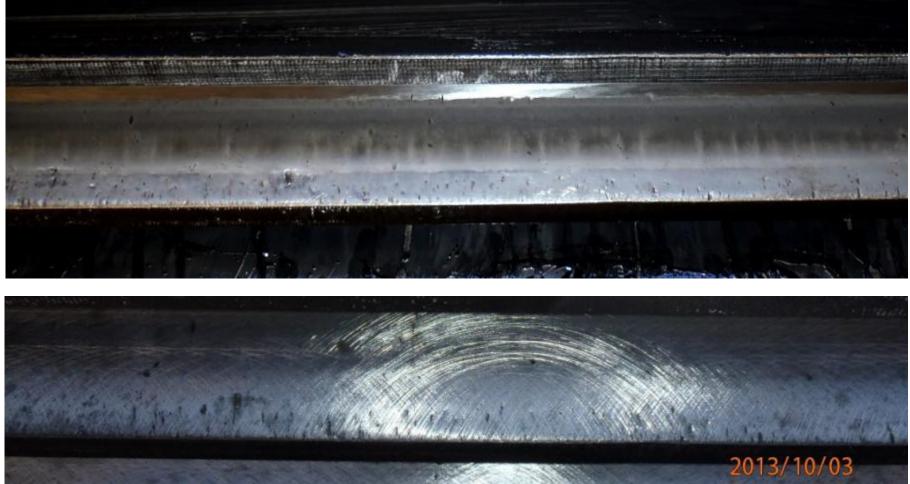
(Above): Gear tooth centre before linishing Frig 5B (Below) Gear tooth centre after linishing note the continuous linish marks indicating removal of local protrusions
